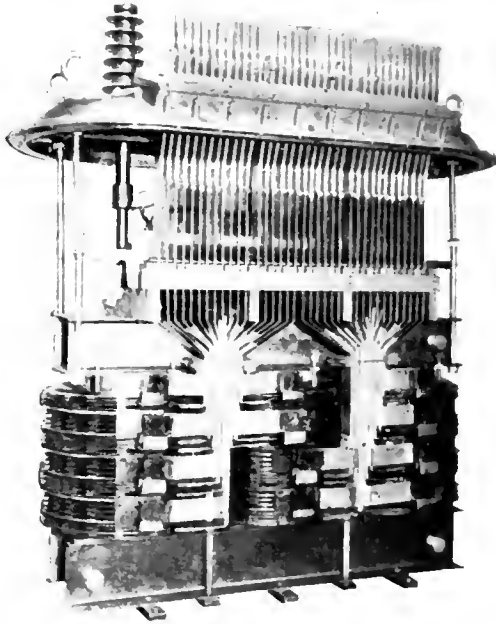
Internal Arrangement of Arc Welding Transformer
